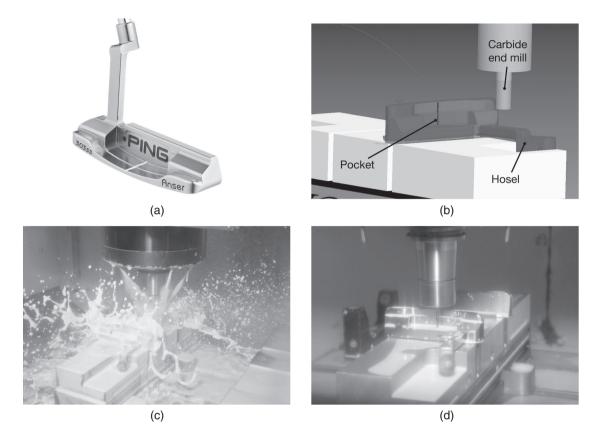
(a) The Ping Anser[®] golf putter; (b) CAD model of rough machining of the putter outer surface; (c) rough machining on a vertical machining center; (d) machining of the lettering in a vertical machining center; the operation was paused to take the photo, as normally the cutting zone is flooded with a coolant. *Source:* Courtesy of Ping Golf, Inc., Phoenix, Arizona.
